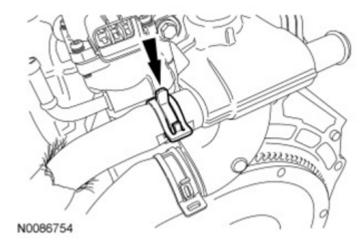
Locating Coolant Hose Courtesy of FORD MOTOR CO.
